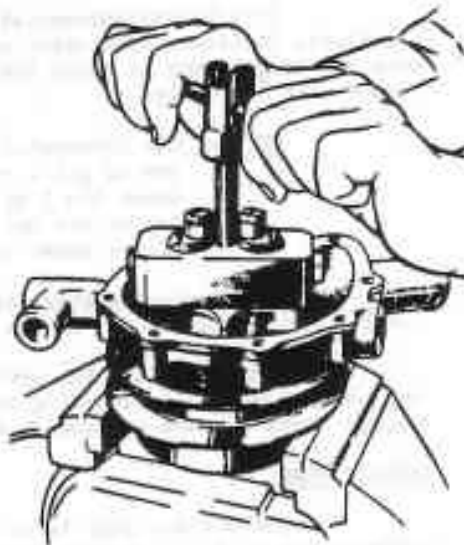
REMOVING ROTOR FROM SPINDLE.
